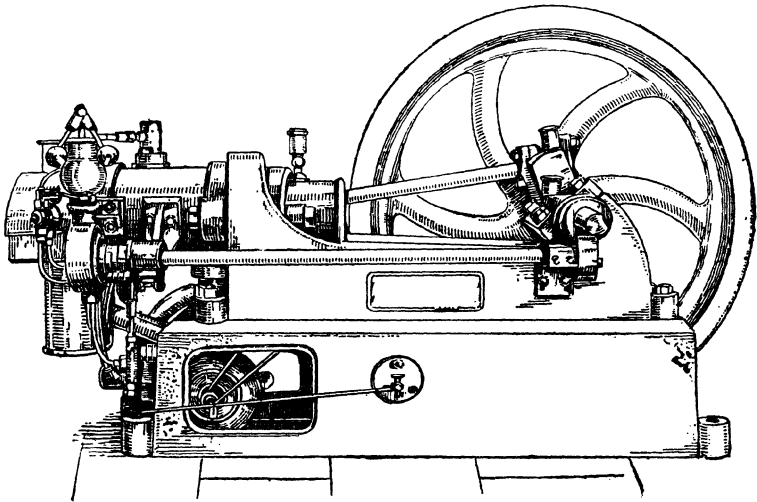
Hornsby-Akroyd Oil Engine (1892 Type)
